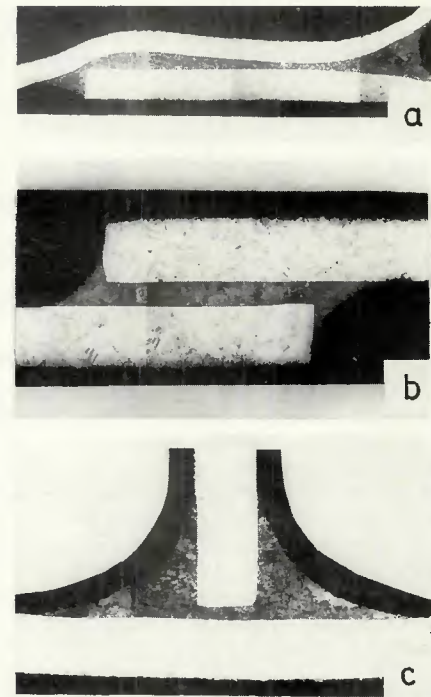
Examples of joints brazed with the standard composite brazing wire
